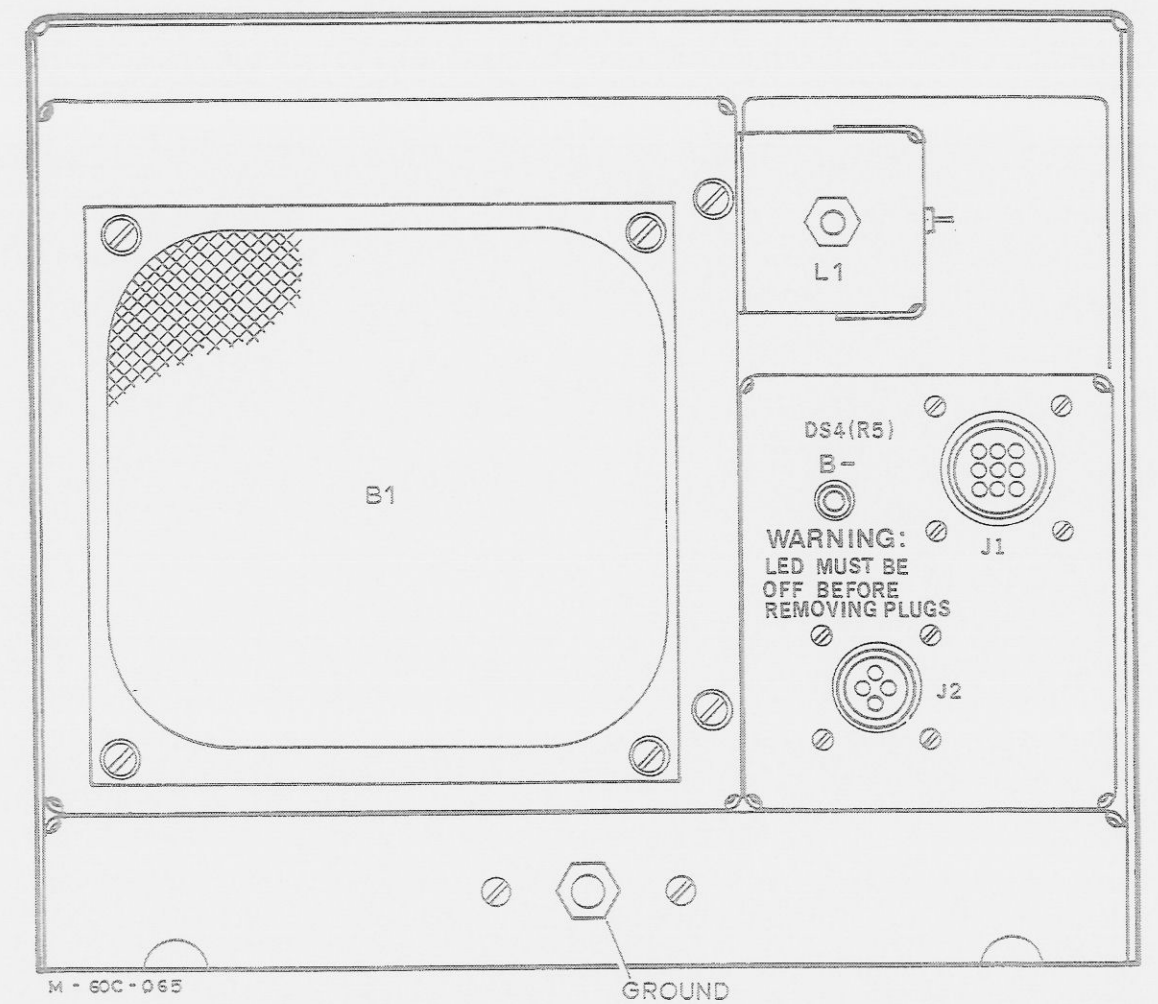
Assembly Detail - NAP10/1 1.25 kW AM Power Subsystem Module (Rear View)
